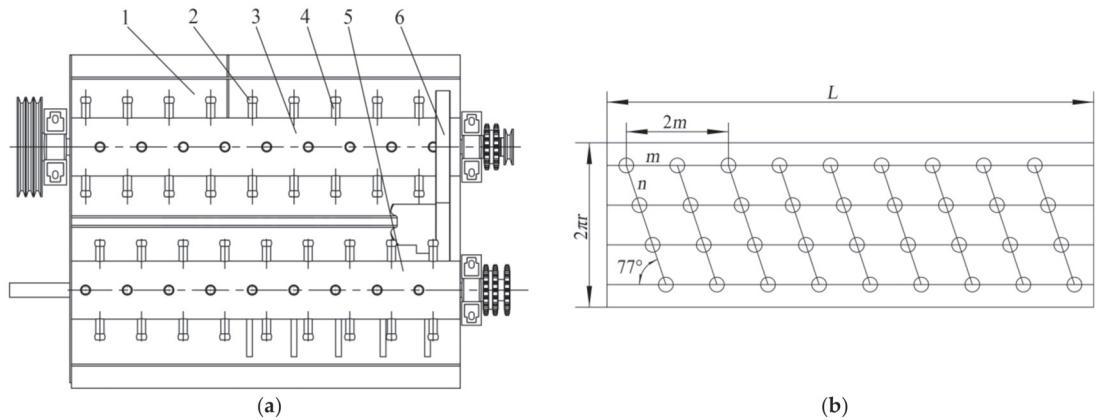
Model and expansion scheme of threshing drum. 1. Feeding inlet 2. Rubber 3. First drum body 4. Threshing tooth 5. Ear guide plate 6. Second drum body. (a) Structure scheme, (b) Cylinder unfolded view. Note: m is the distance between two adjacent teeth on the same axis, mm; n is the arc length of two adjacent teeth on the same spiral line, mm; L is the drum length, mm.
